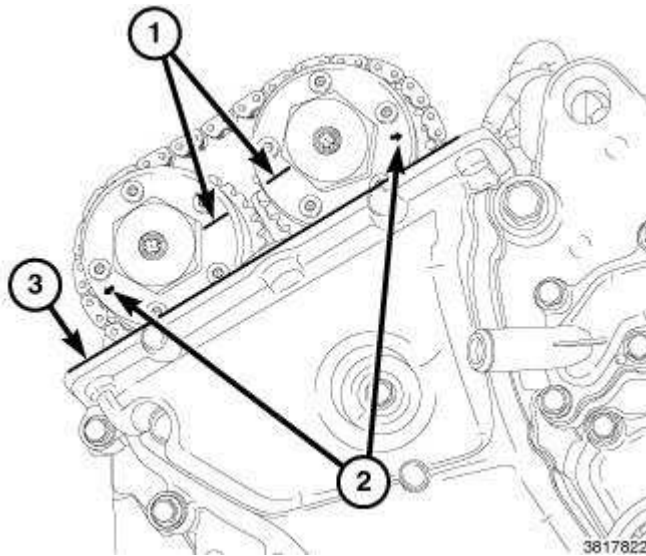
Arrows, Scribe Lines & Cylinder Head Cover Mounting Surface
